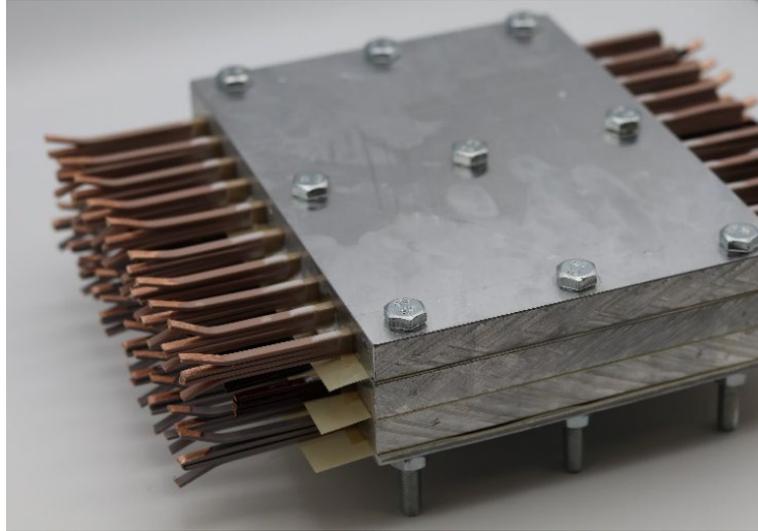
MOTORETTE BLOCK USED TO CARRY OUT THERMOMECHANICAL AGEING TESTS
